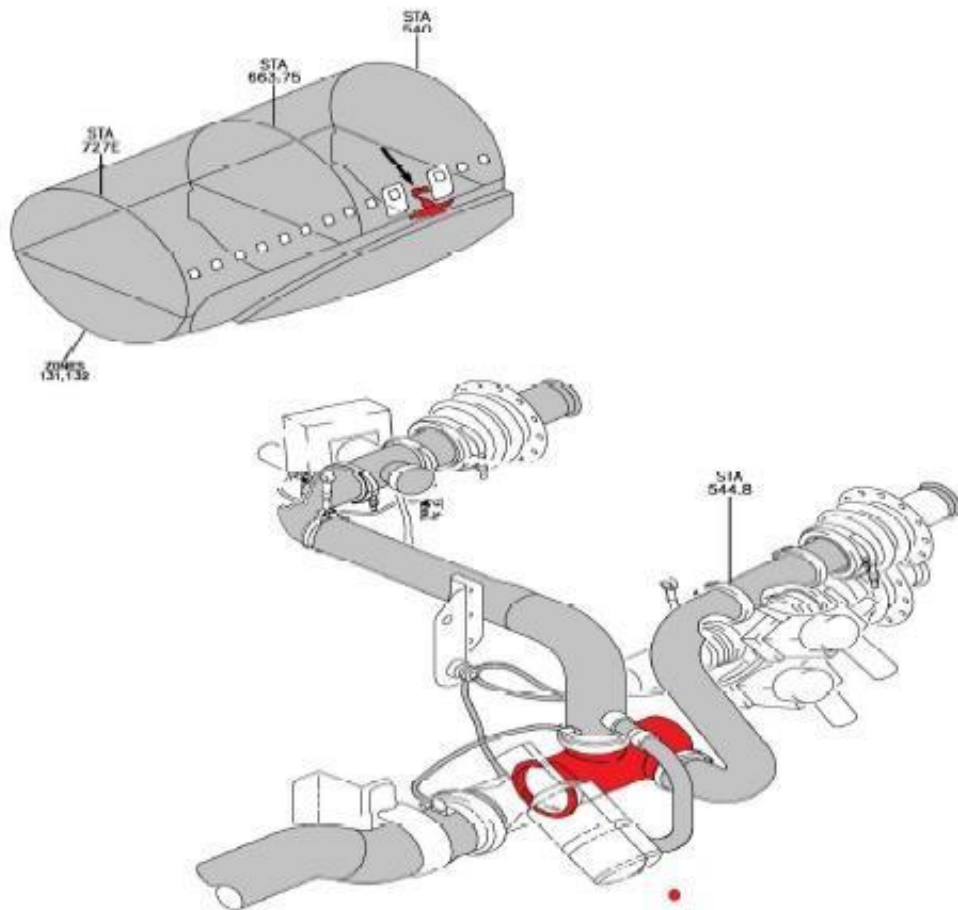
REPLACE TRIM AIR DUCT ASSEMBLY P/N 213A1501-45 WITH P/N 213A1501-73
